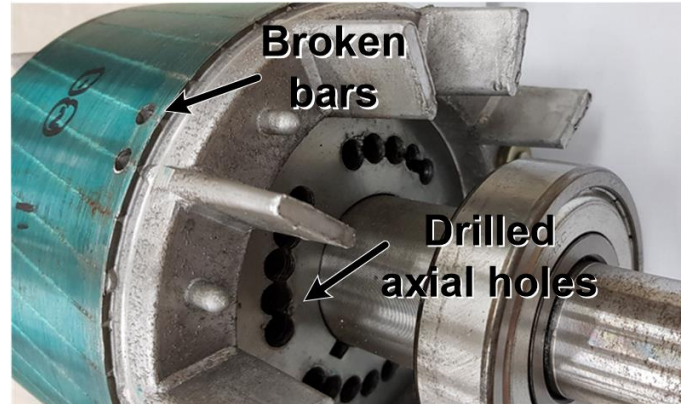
4 axial air ducts drilled in aluminum die cast rotor of 4 poles, 380 V, 5.5 kW induction motor
